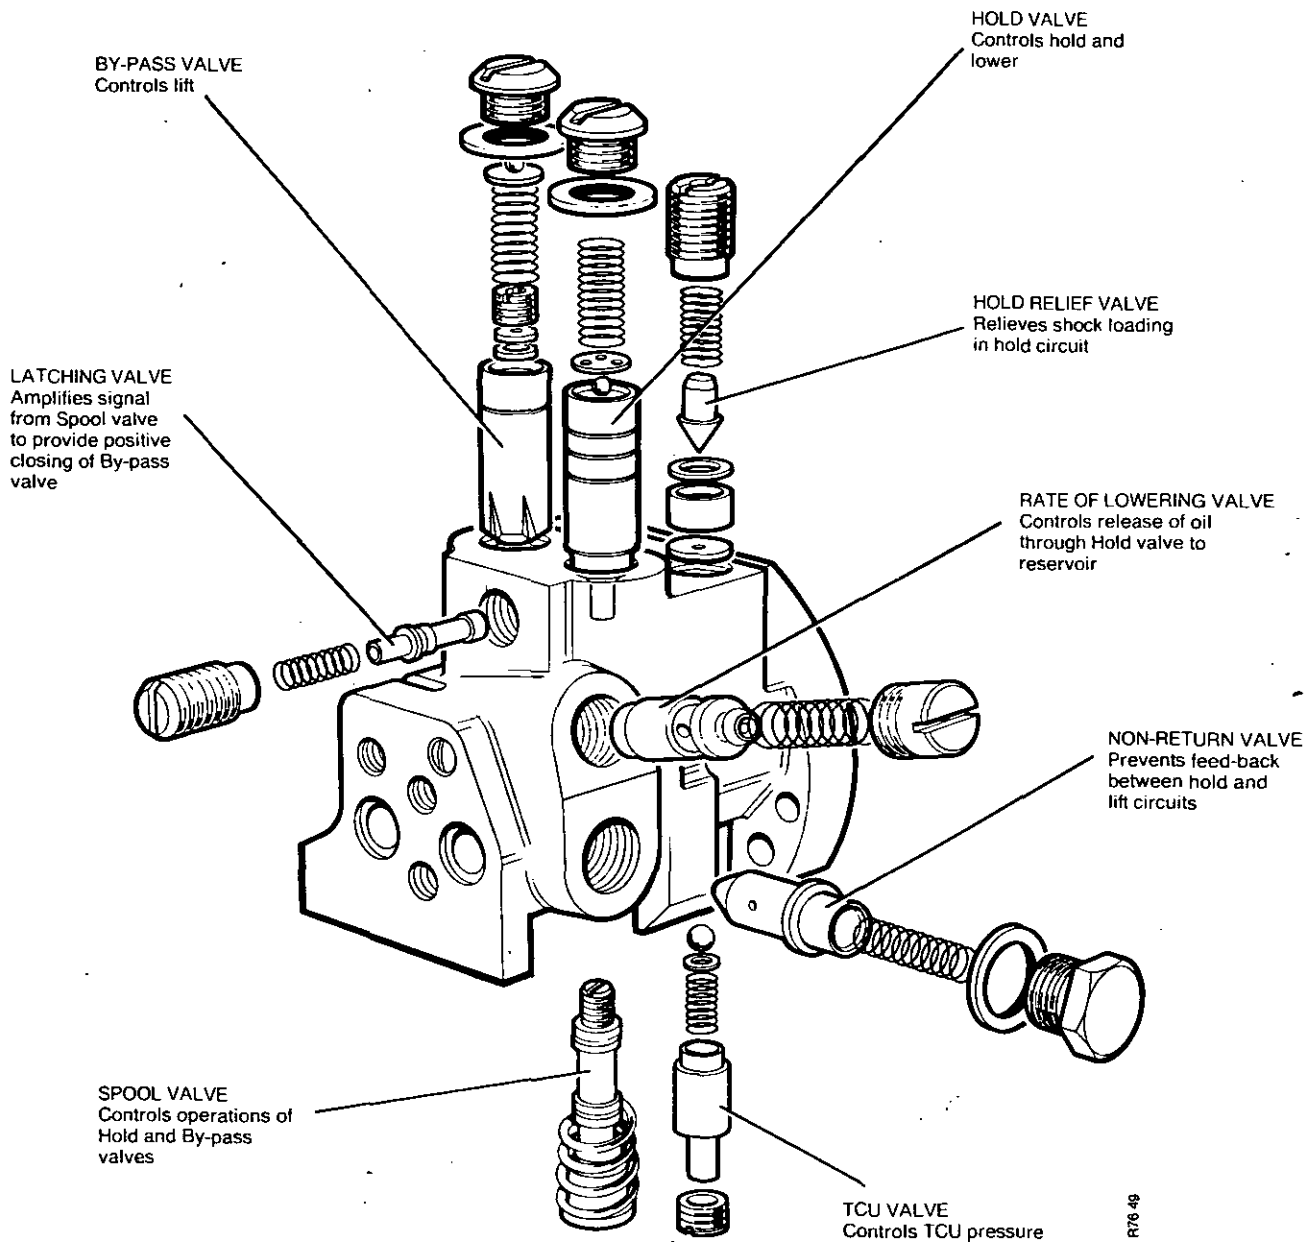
BASIC FUNCTION OF VALVES IN SELECTAMATIC VALVE ASSEMBLY
